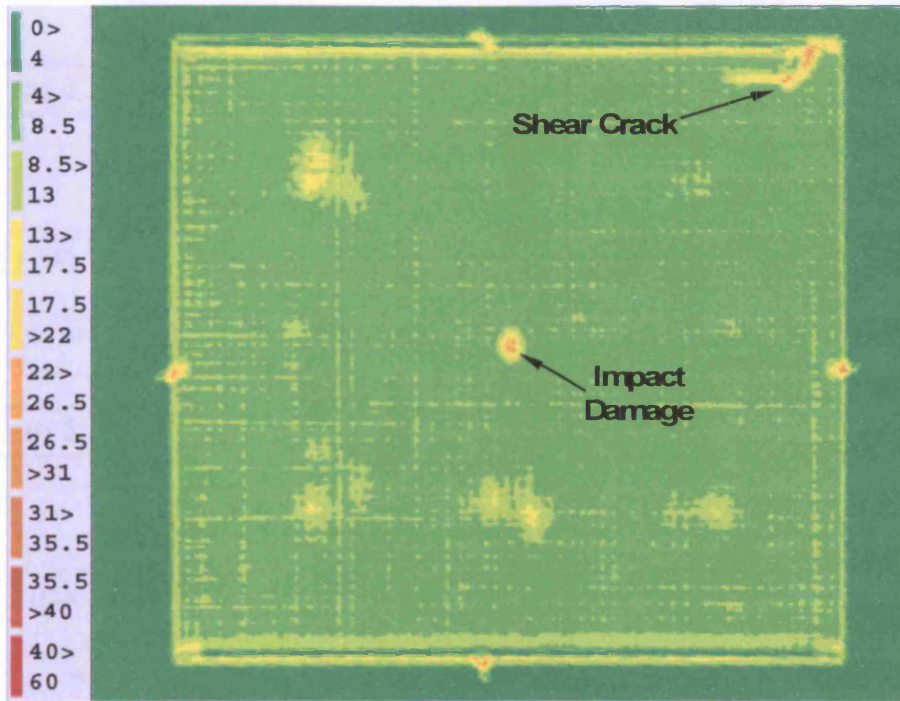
Specimen 12 C-scan image after stage two testing
